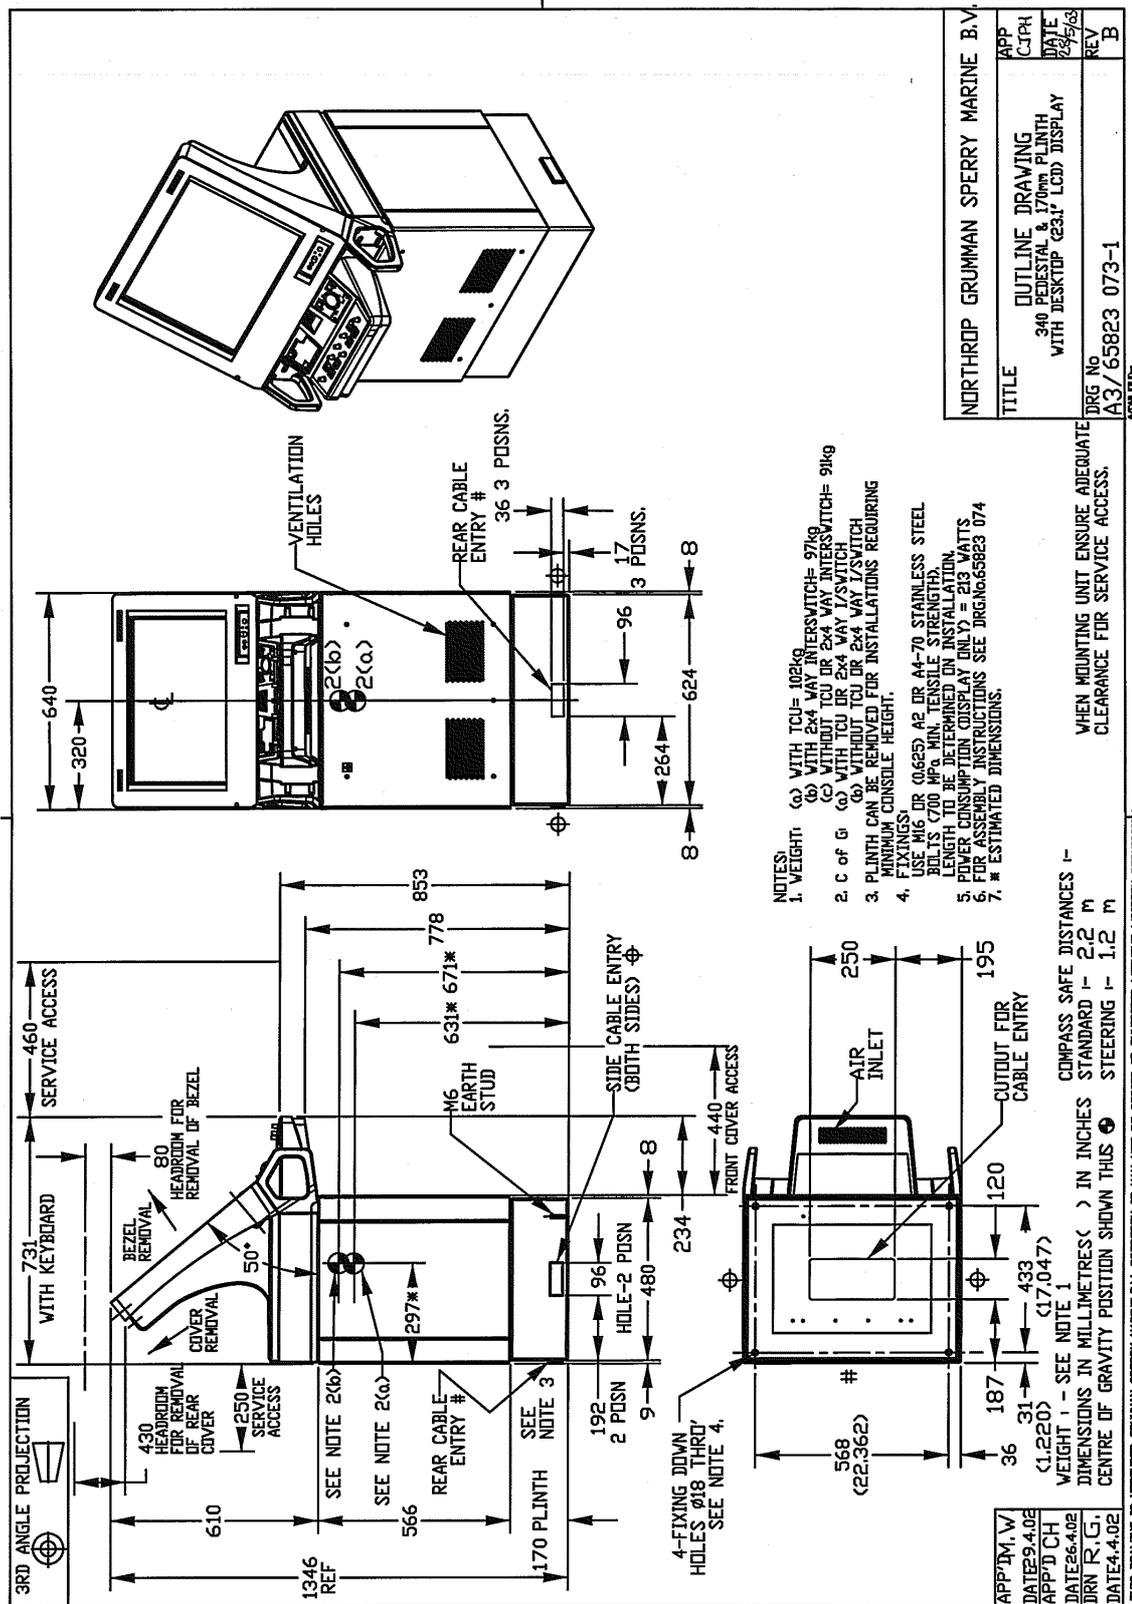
340 Display Unit (FPD with Pedestal) Outline Drawing
